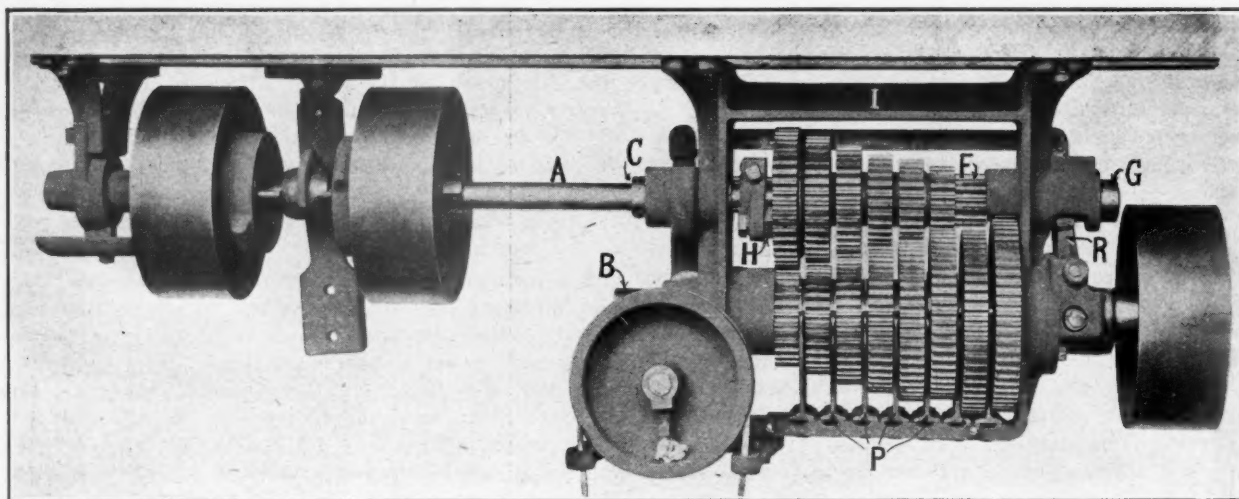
REAR VIEW WITH COVERS REMOVED, SHOWING ROPE SHEAVE FOR SHIFTING SLIDING CONE.
